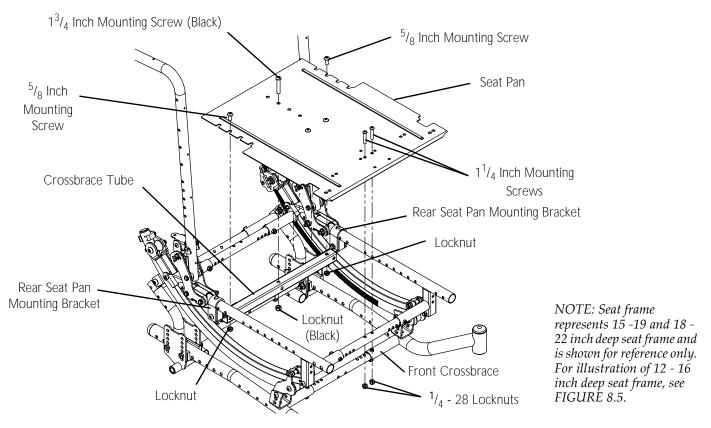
Install the Seat Pan - Drop Mount - 12 - 16 Inch and 15 - 19 Inch Deep Seat Frames
